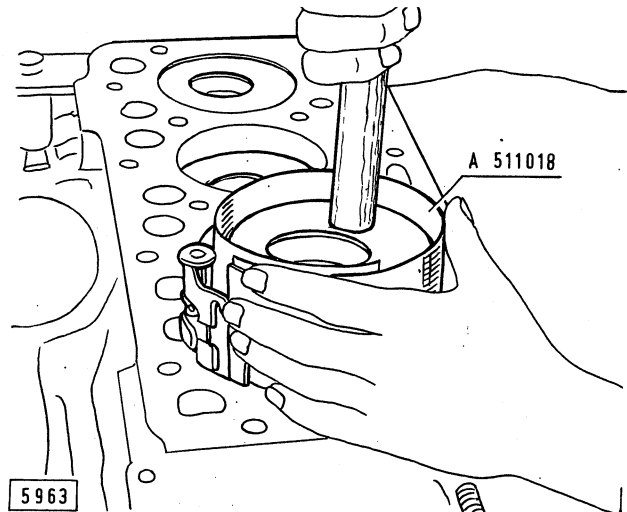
Fitting a piston inside its cylinder liner with piston ring band A 511018.
